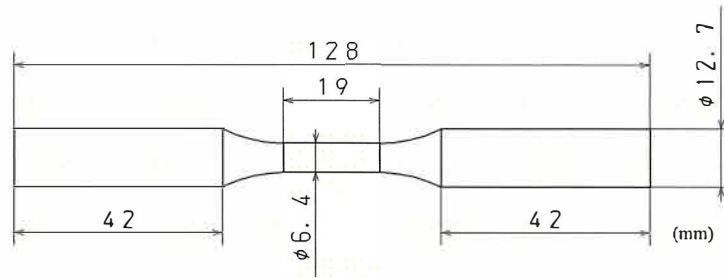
Transformation point measurement test piece shape and dimensions.
